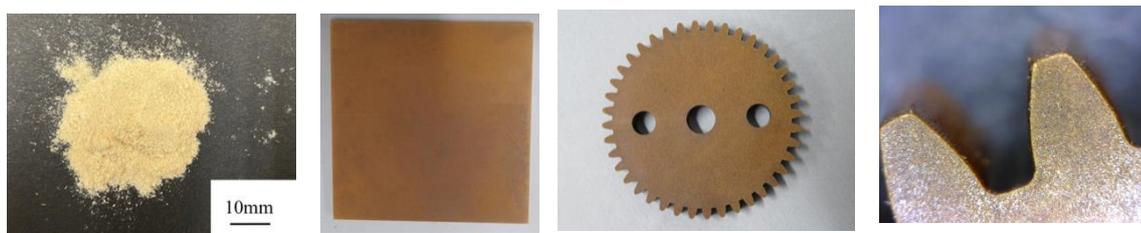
Manufacturing process of bamboo gear a) powder, b) pre-product, c) spur gear, and d) magnification view of gear
